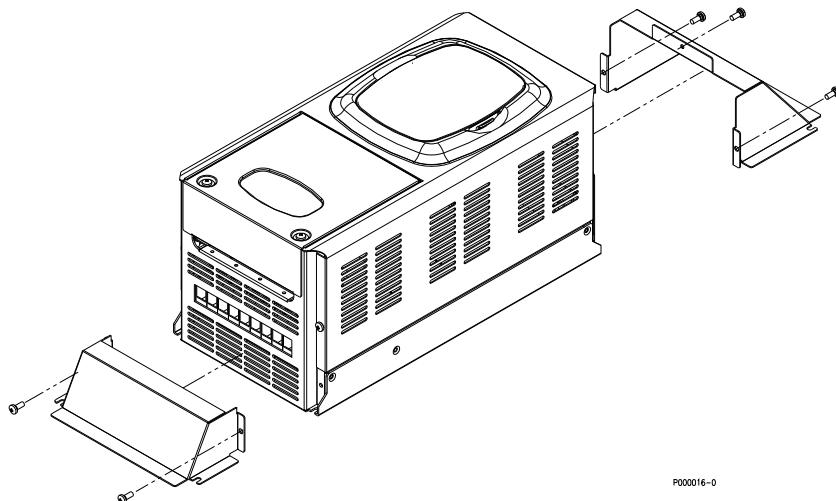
Mounting the accessories for the through-panel assembly of SINUS K S05.
